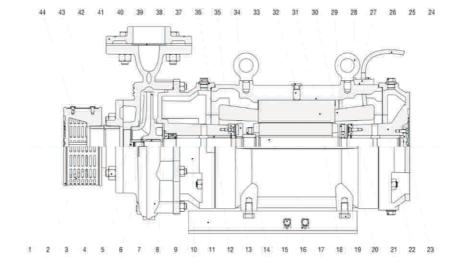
Cross-Section View Of Open Well Submersible SSM-N Series
